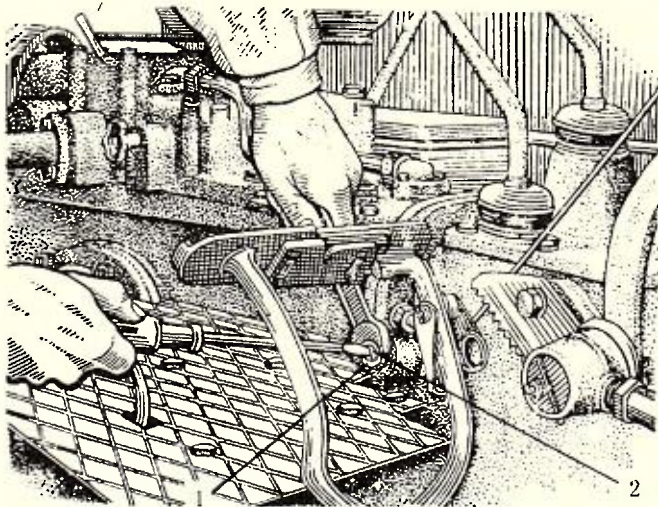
14 Adjusting the spring tension of the detent plug of Hi - Lo gear shift fork shaft
